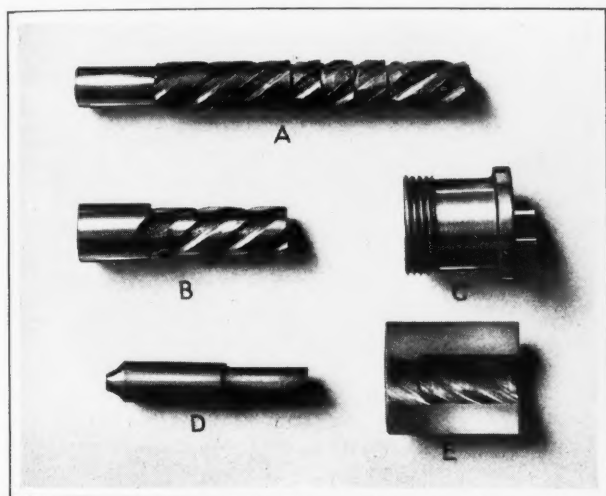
Small Fluted Pieces and Cutter and Broach Used for Fluting
